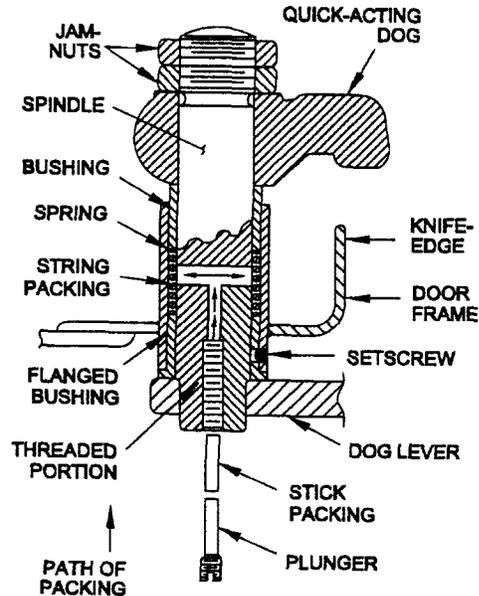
Quick-Acting Door Dog Assembly (Cross Sectional View)
